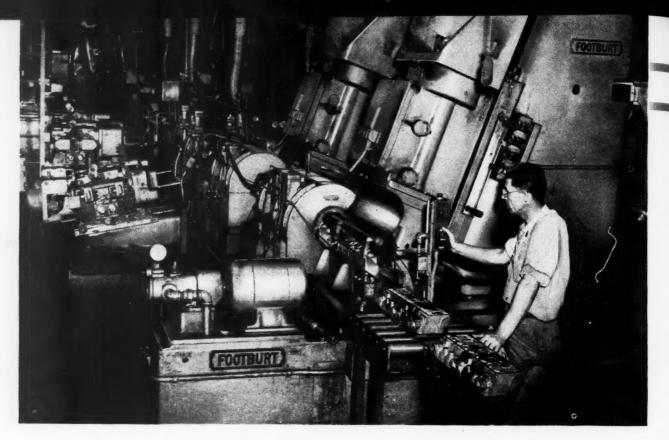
Ten-station transfer machine employed for milling, drilling, counterboring, facing, and reaming cylinder heads at the rate of fifty per hour
